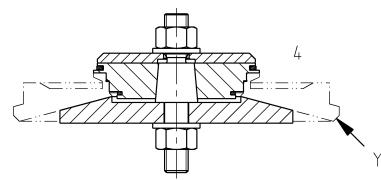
4=welding jig for housing connection T Y= 2.welding
